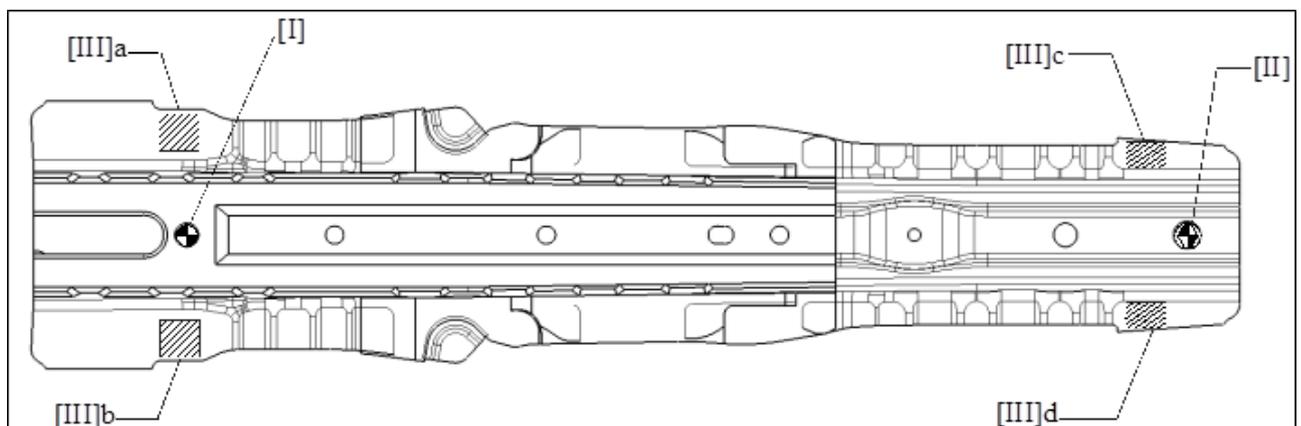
Datum Locations of Specimen in Technical Drawing
